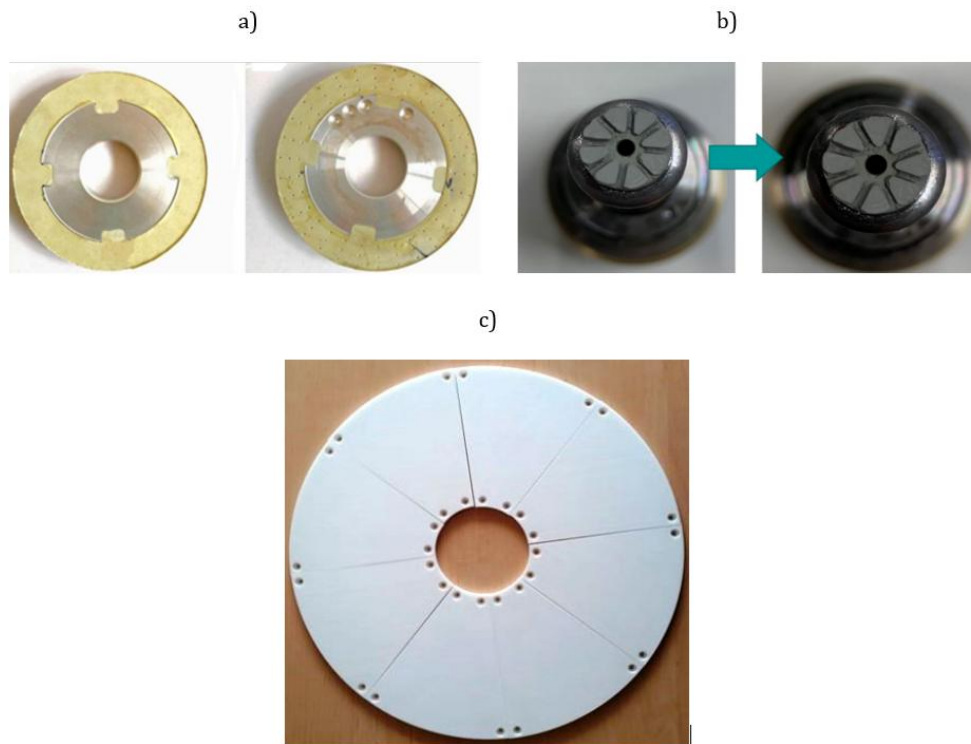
Polyamide based abrasive tools: a) resin bonded diamond-grinding wheel without cooling and cooling holes [43], b) material extrusion based grinding tool before and after ultra-fine grinding [44], c) segmented single-sided lapping wheel [42]
